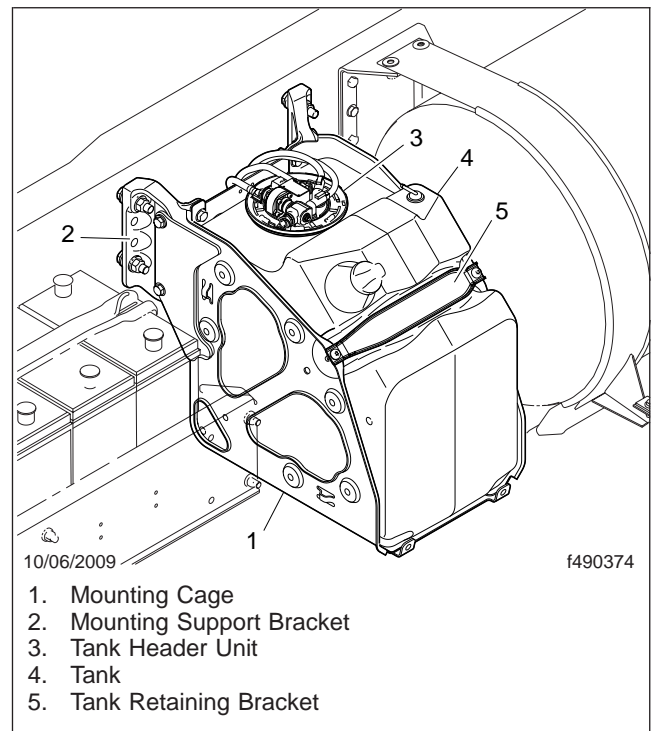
, 13- or 23-Gallon DEF Tank Mounting Assembly
